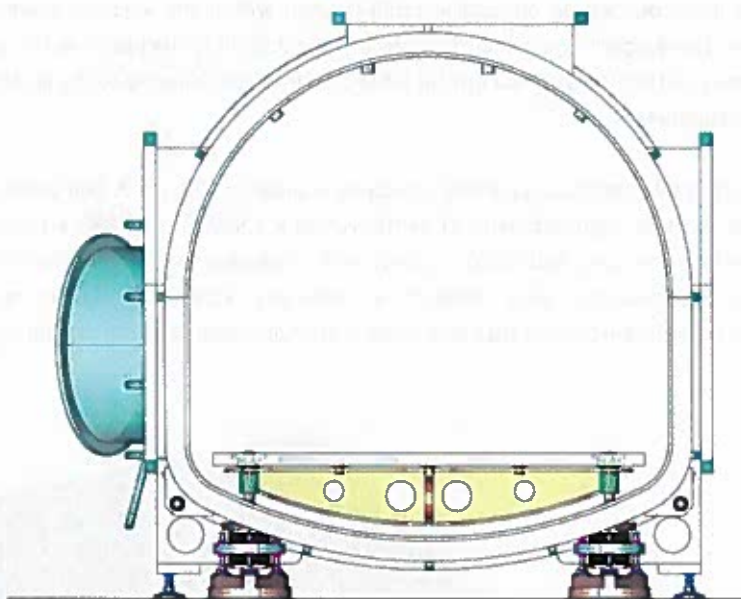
End view of the optical table integrated within the compressor, showing position of the optical table supports with respect to the body of the chamber.
